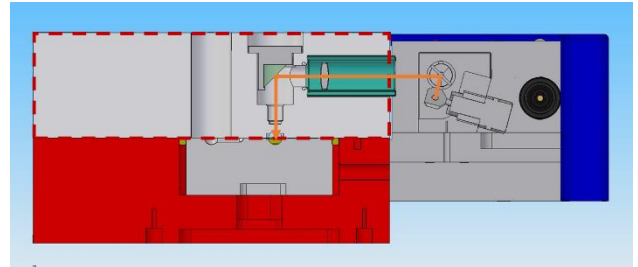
CAD cross sectional image of probe head and part of the mould. The red dashed line marks the vertically moveable upper part. The orange line indicates the sample beam between the galvo scanners and the cavity.
